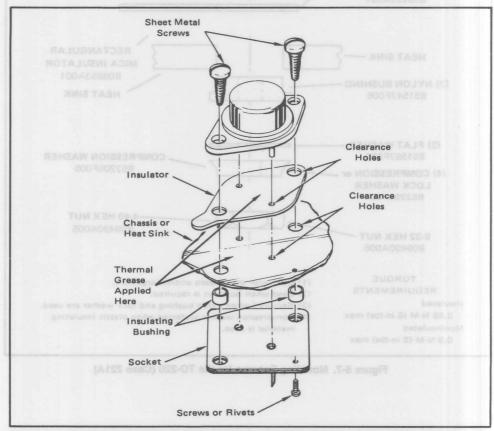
Mounting Details for Flat-Base Mounted Semiconductors (TO-66 Shown). When not using a socket, machine screws tightened to their torque limits will produce lowest thermal resistance.
